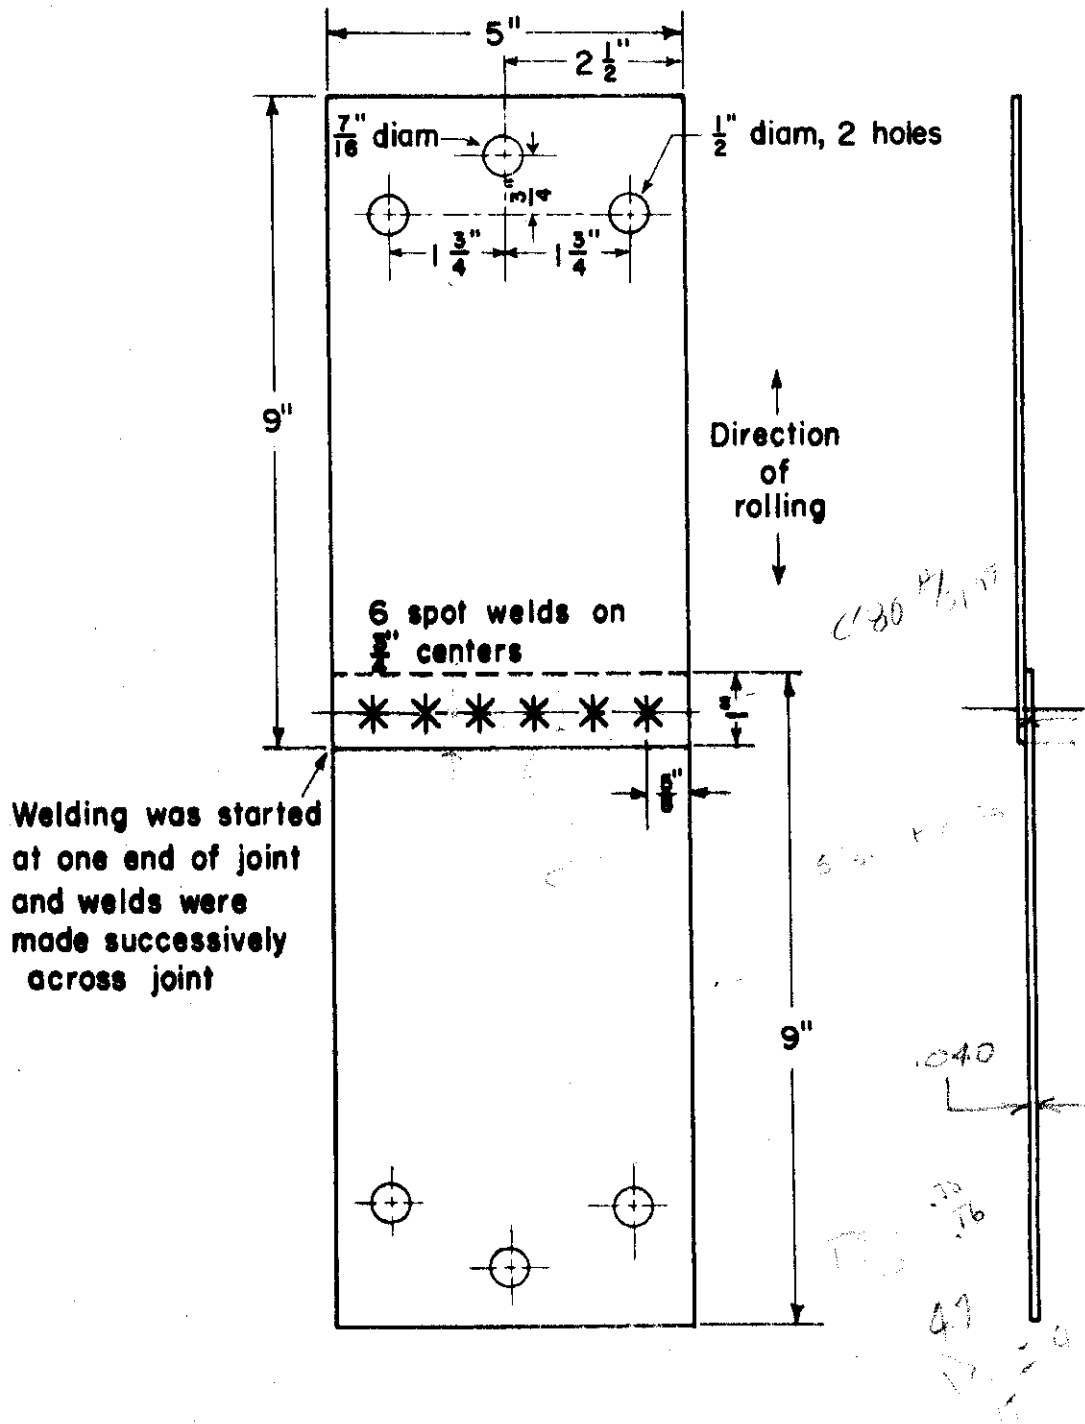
SPOT-WELDED FATIGUE-TEST SPECIMEN
